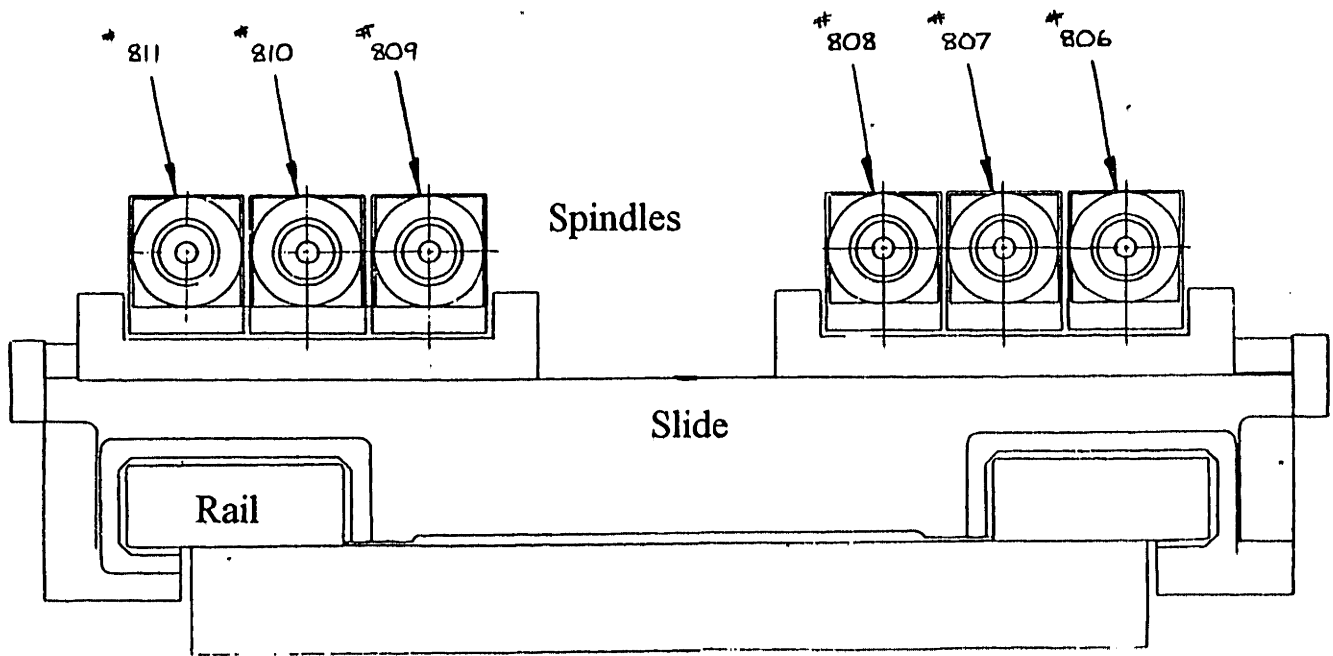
Front view of a machining station for drilling bores in an engine block. Six spindles, numbered #806 to #811, are mounted on a slide which moves along the two rails shown. These rails are in turn positioned on a wing base which is not depicted.
